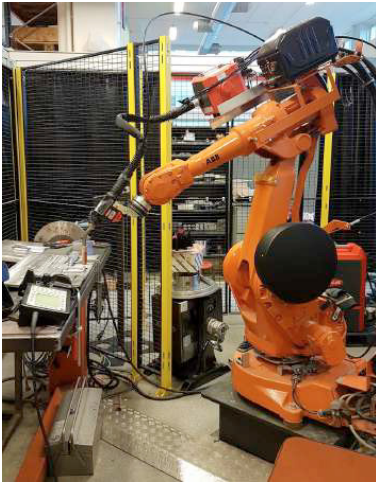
Experimental set-up: ABB IRB2400/10 robot manipulator with welding equipment from Fronius.
